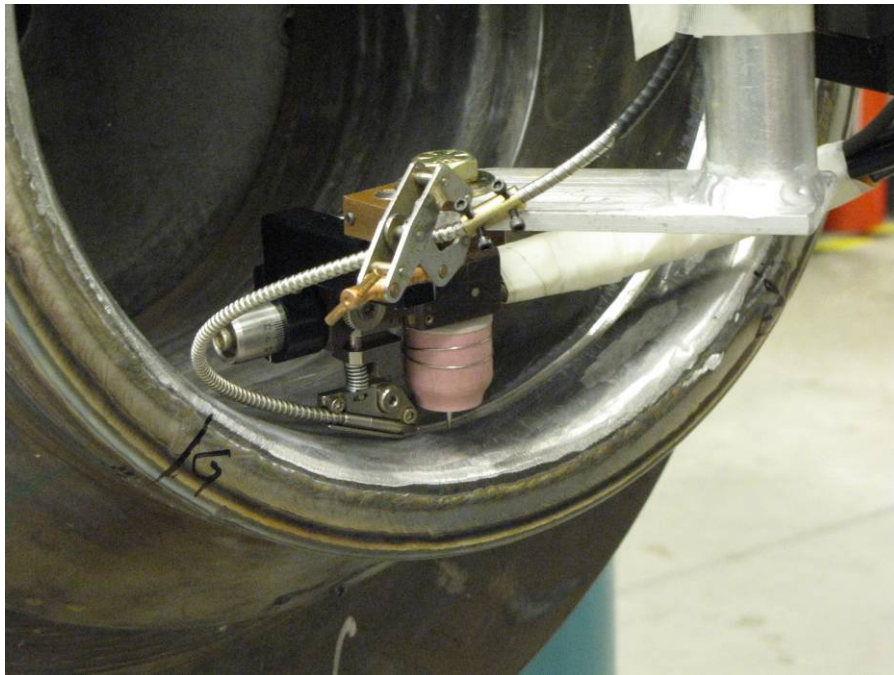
Photo of the ID Welding Torch on the WOM Buttering
